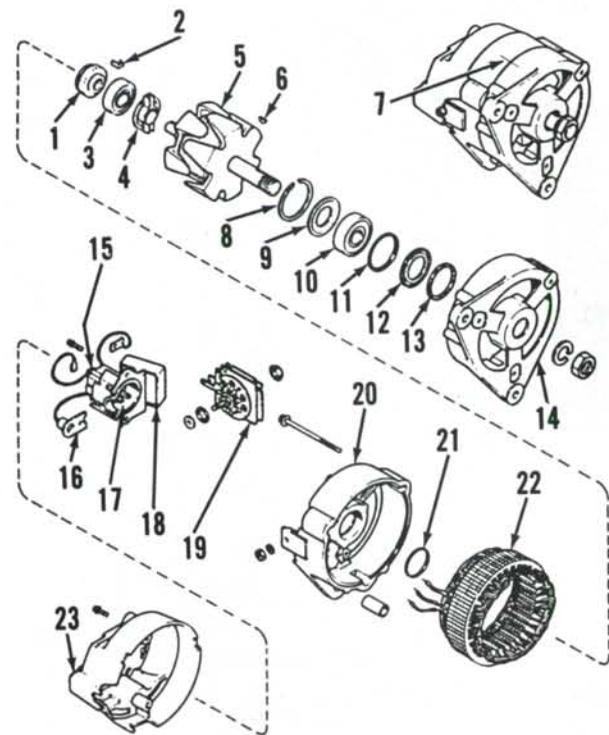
Exploded view of standard-duty Lucas alternator showing component parts and their relative positions.
